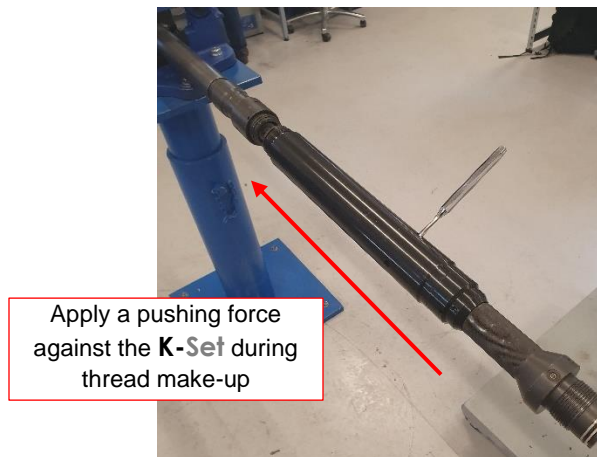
Image showing Pin Punch inserted through Piston Housing to engage make-up shoulder
